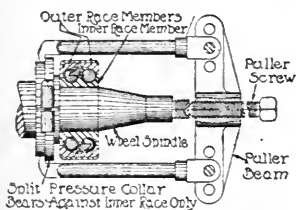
Modified Form of Wheel Puller Having Two Arms and Cross Beam for Displacing a Bearing Cone.
